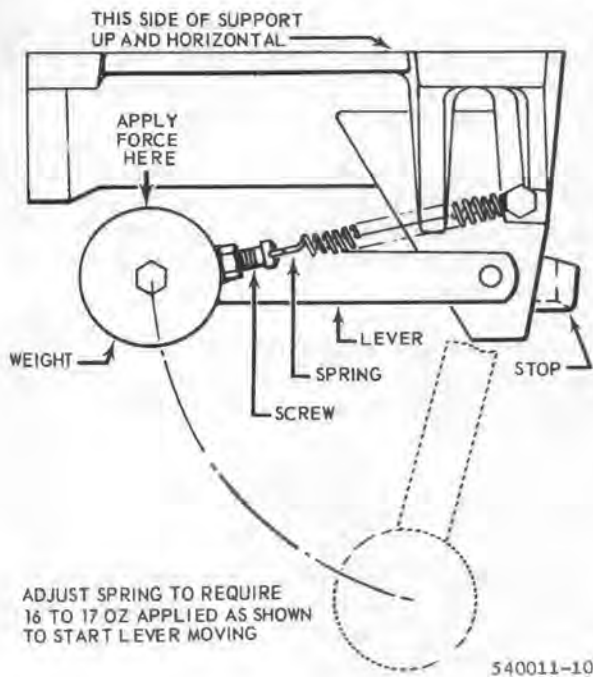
Checking spring tension on stop assembly (UH-1B Serial No. 64-14101 and subsequent)
